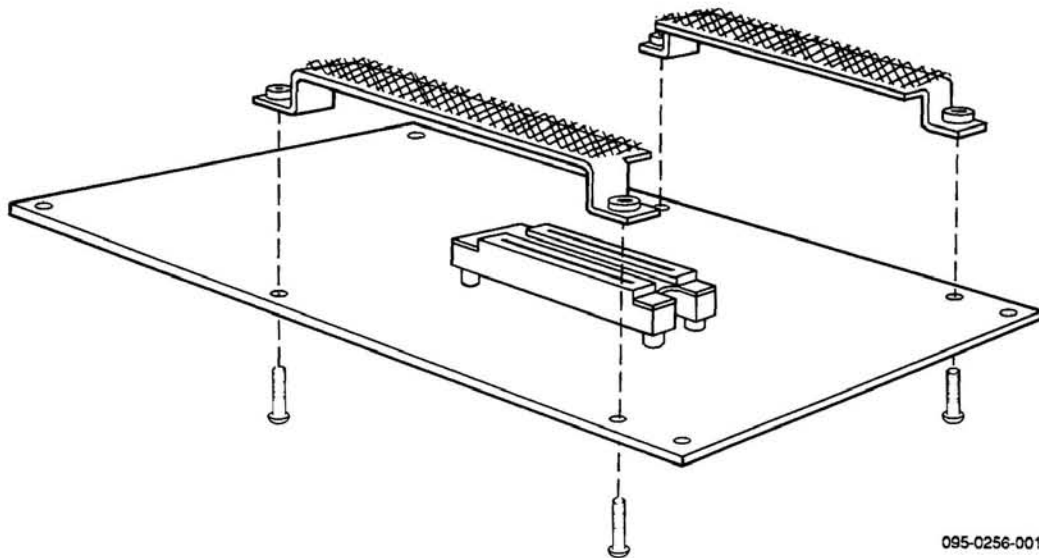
Installing the Velcro Mounting Brackets on the Performance Board
